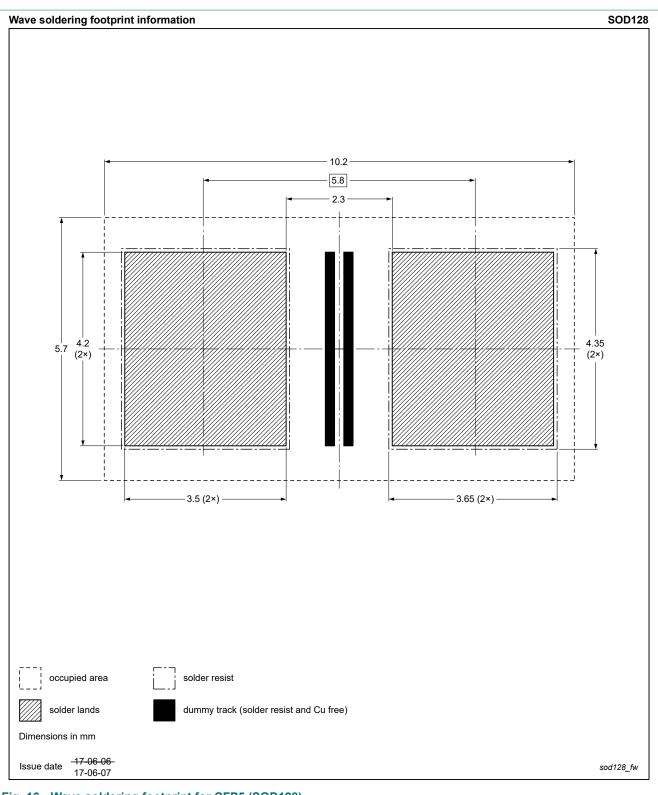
Wave soldering footprint for CFP5 (SOD128)
